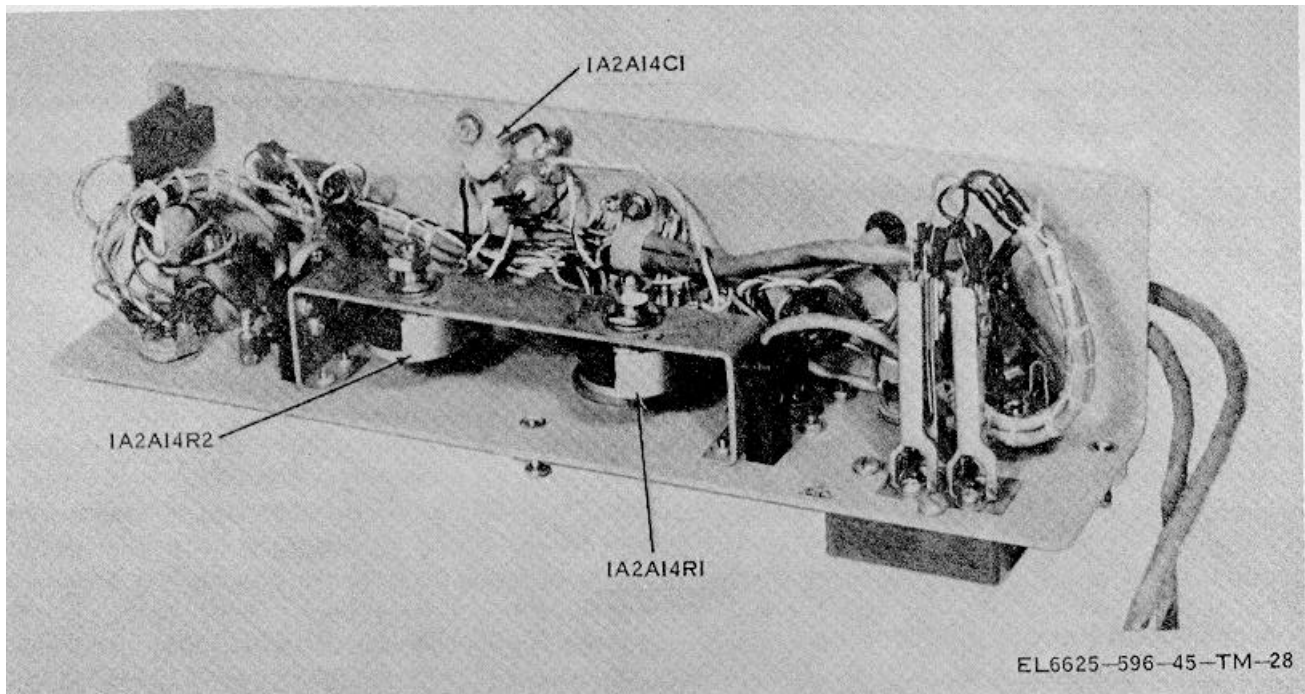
Electrical test panel 1A2A14, bottom view.
